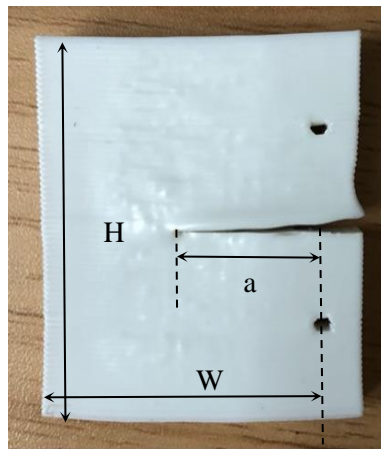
Dimensions and Fabrication of Tensile and CT specimen
